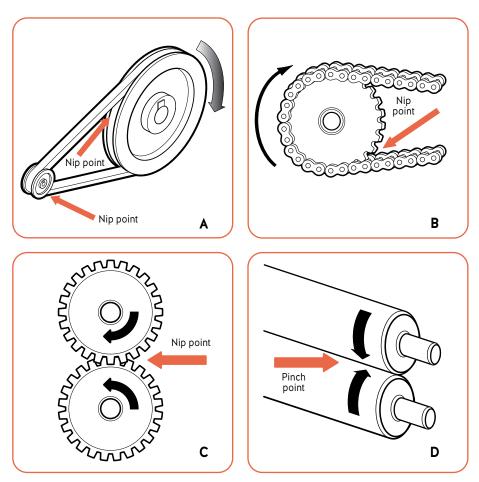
Multiple rotating parts presenting an in-running nip point hazard. (A) V-belt and pulley drive: a common source of in-running nip points on powered industrial machinery. (B) Typical chain-sprocket drive. (C) Typical exposed gears. (D) Typical feed rolls.
